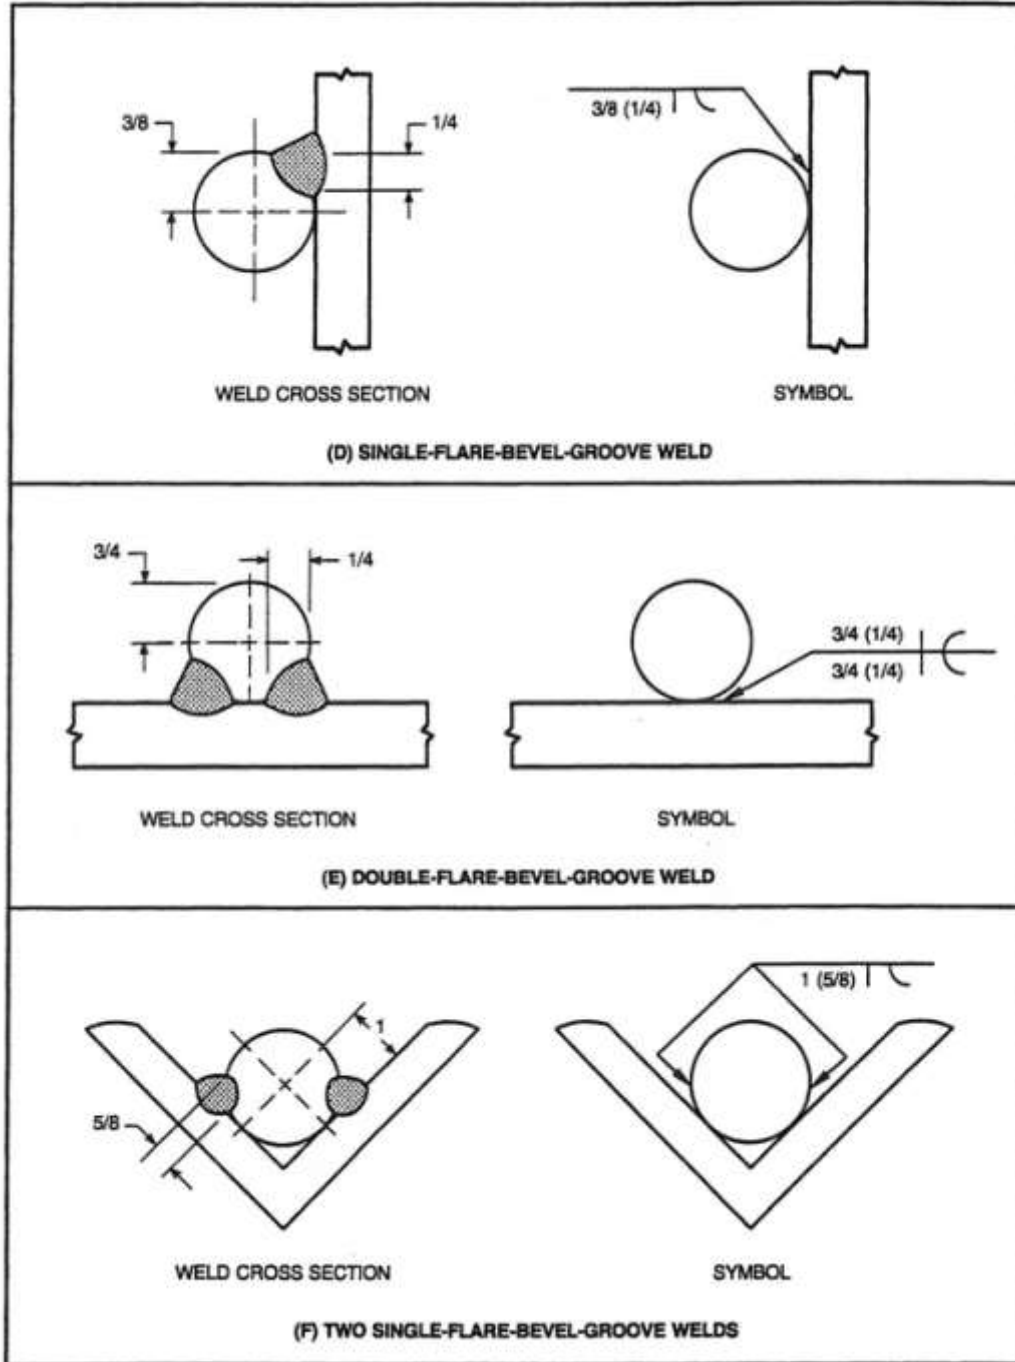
Applications of Flare-Bevel and Flare-V-Groove Weld Symbol-1
